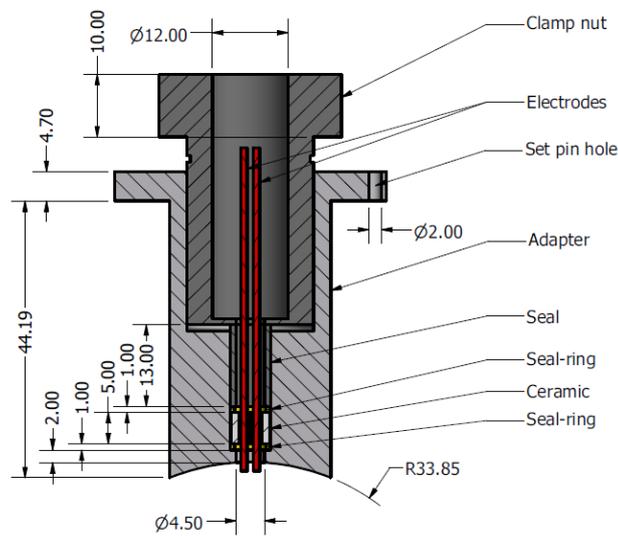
Sectional view of the developed ionization sensor. Dimensions in mm.
